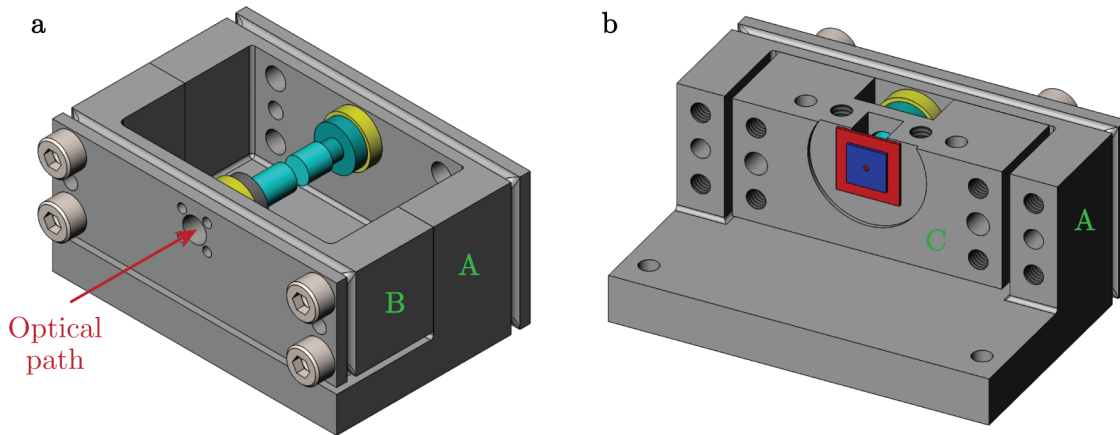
Optomechanical part of the hybrid device assembly.
